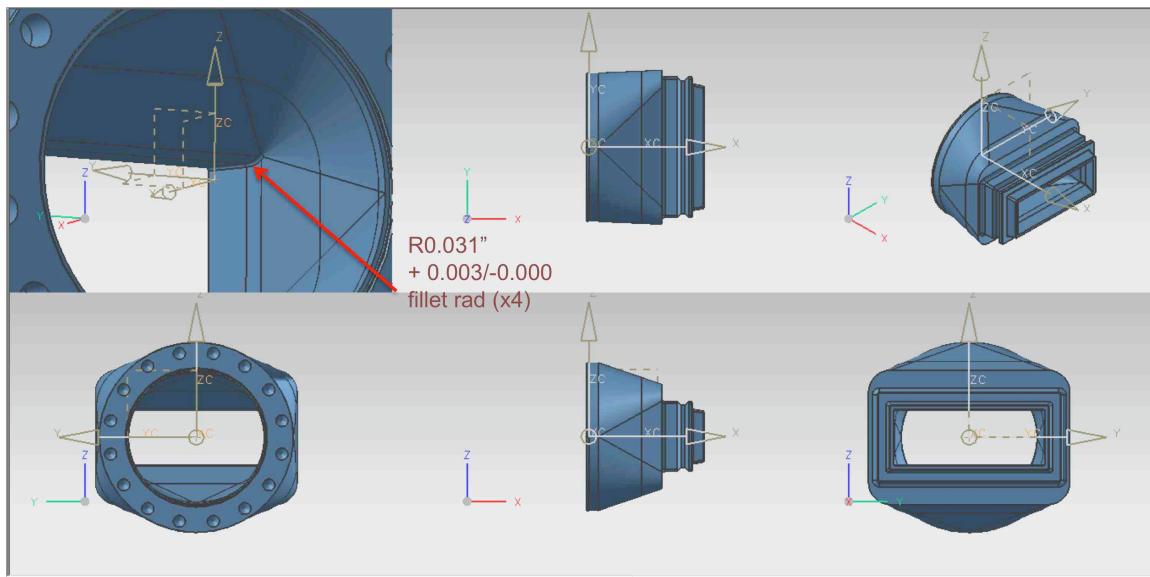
GOVERNMENT FURNISHED EQUIPMENT, PARTID DR2A4--SIX VIEWS
